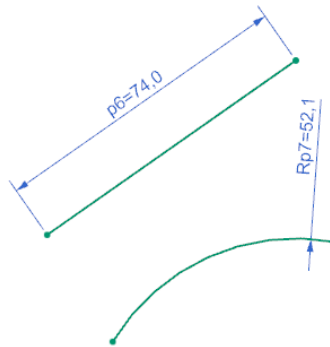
The radial and linear dimensions created by using the Rapid Dimension tool
